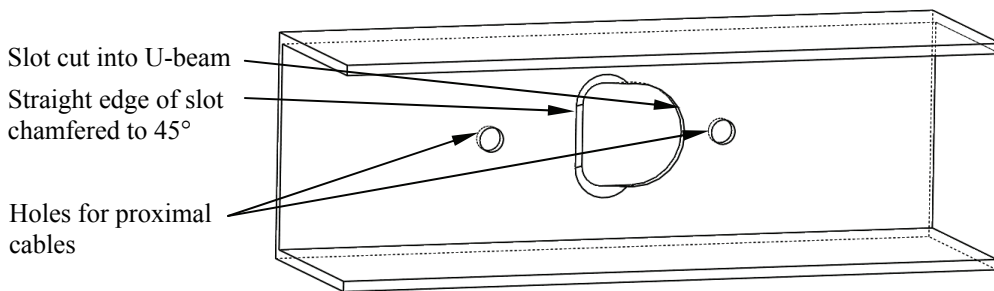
An isolated view of the U-beam showing the holes for cable attachment, the slot for the locking rod, and the chamfered straight edge of the slot
